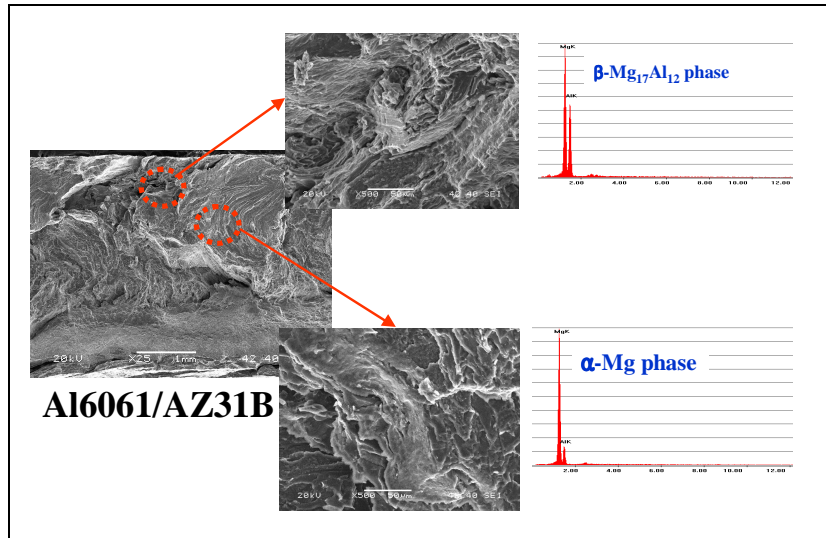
Tensile fracture surface of dissimilar Al6061/AZ31B alloy FSWelded by SEM
